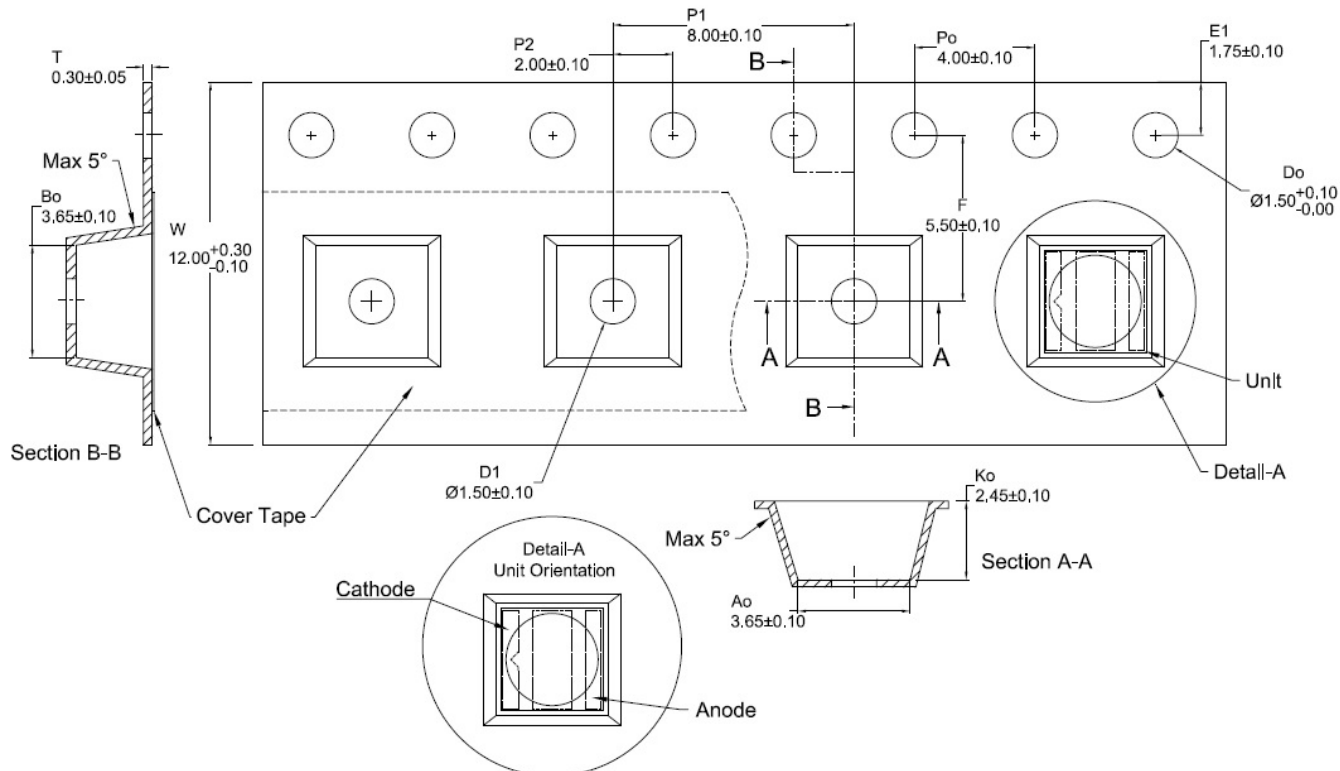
Pocket tape dimensions for LUXEON HL2X-V
